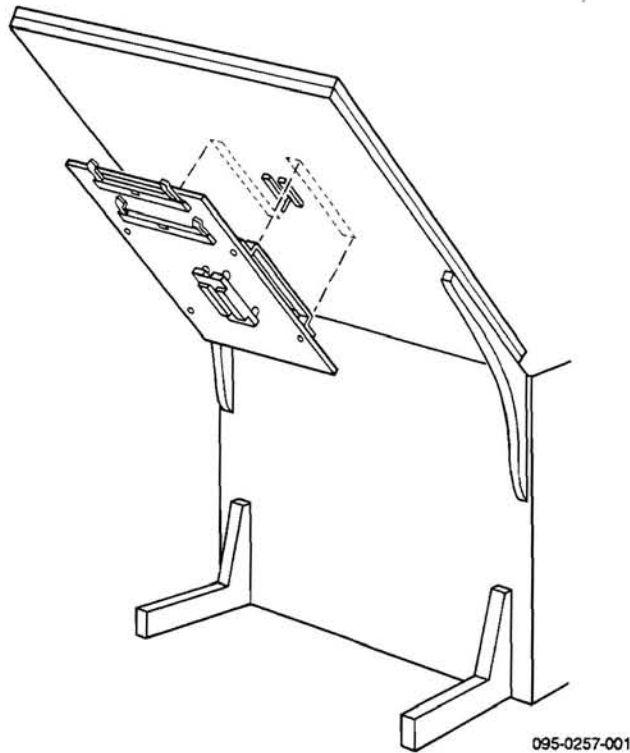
Mounting the Velcro Strips on the MCT Handler
